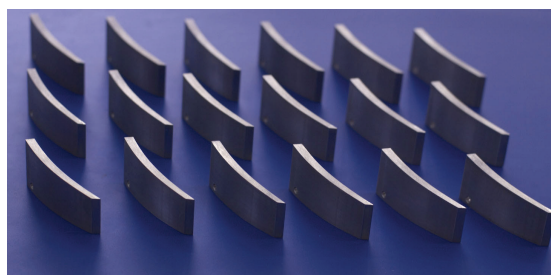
Hub aspiration slot plugs realized by CNC machining to seal the slots on the profiled hub surface.
